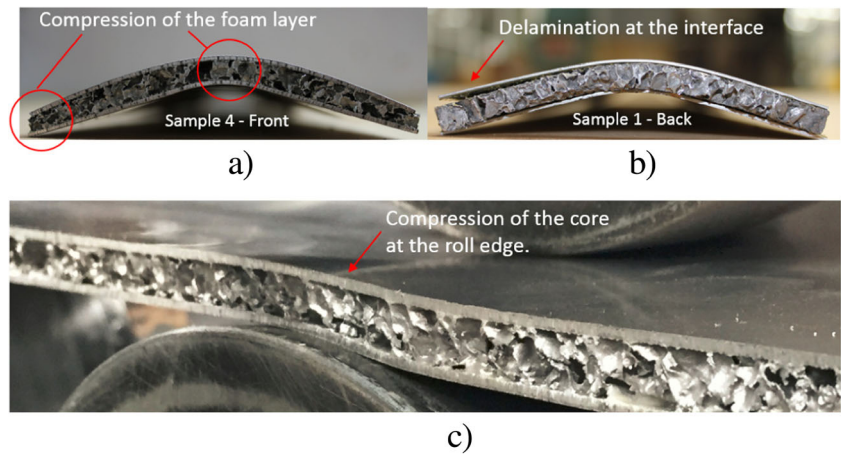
Roll-formed components. a Front section showing compression in the profile radius and the edge. b Back section showing delamination. c Strip edge bent over the outer roll radius indicating compression of the core
